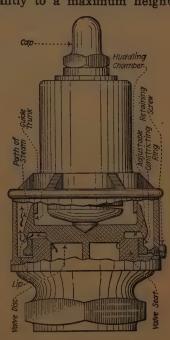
Spring-loaded safety valve with threaded constricting ring.
